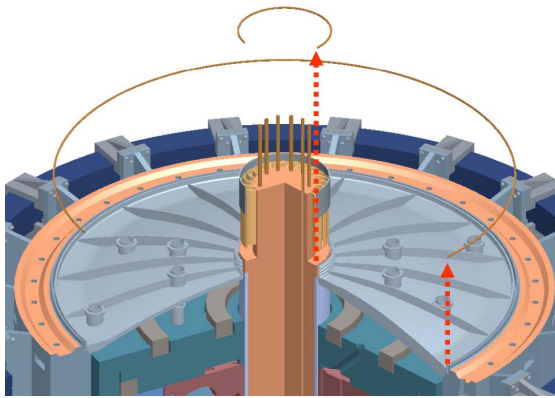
Concepts for removable vacuum weld seals before vertical removal of the top vacuum dome and then the TF coil center post.
